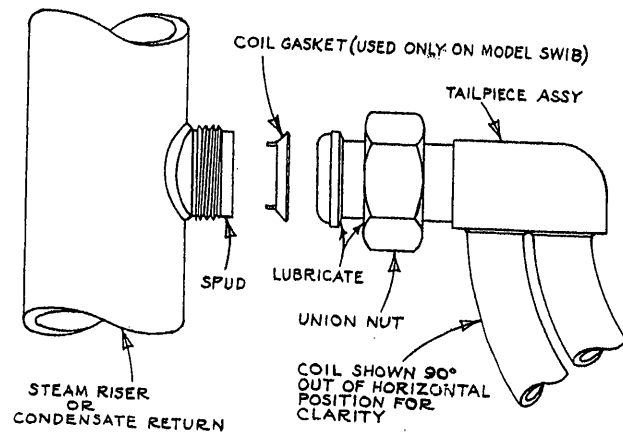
Assembly of Coil to Steam Riser or Condensate Return
